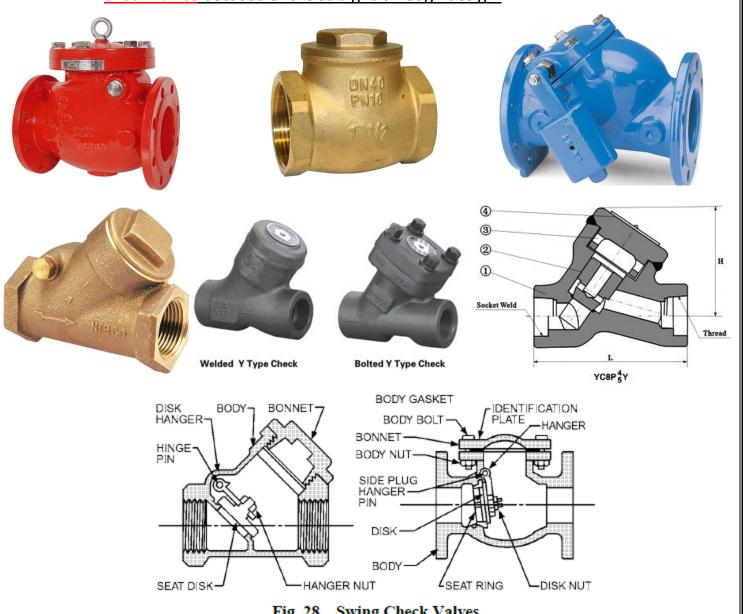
Swing Check Valves (Courtesy Anvil International)
